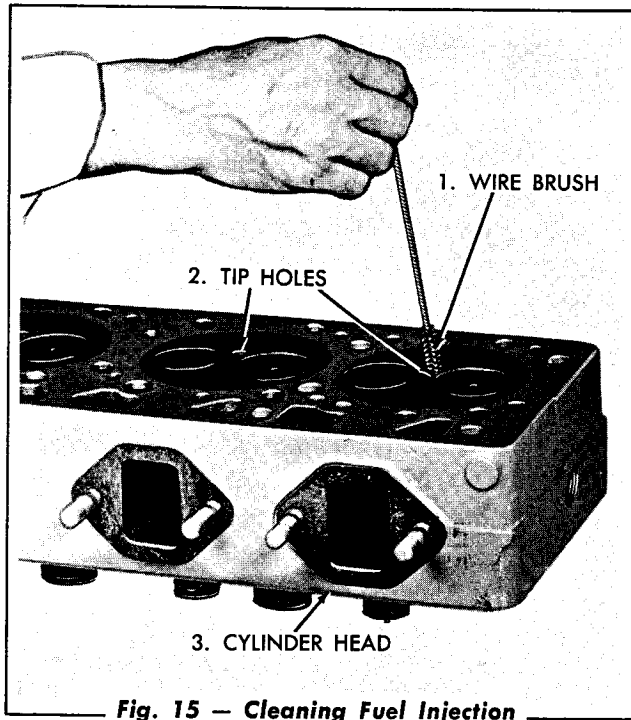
Cleaning Fuel Injection Nozzle Tip Hole
